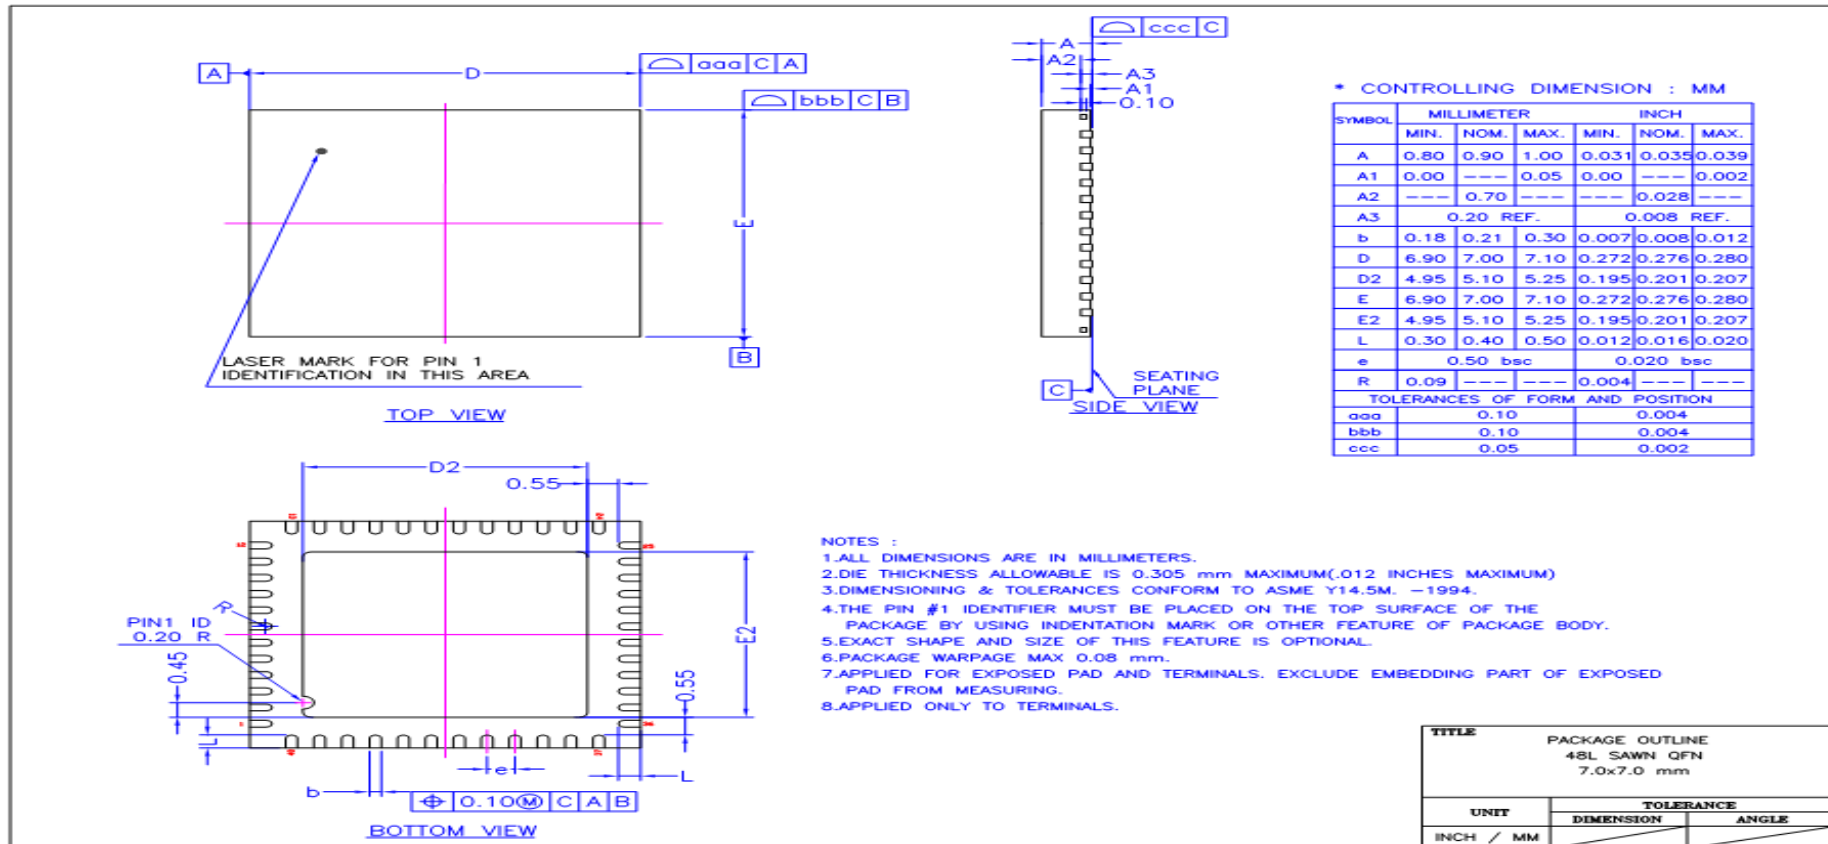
llustratesthepackage details for the RDA5990. The package is lead-free and RoHS-compliant.
